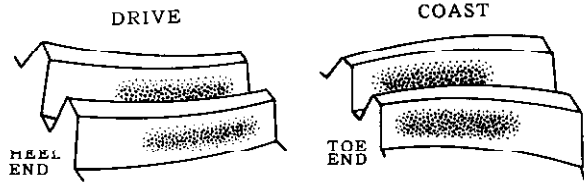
Ideal Ring Gear Tooth Contact Under Light Load
